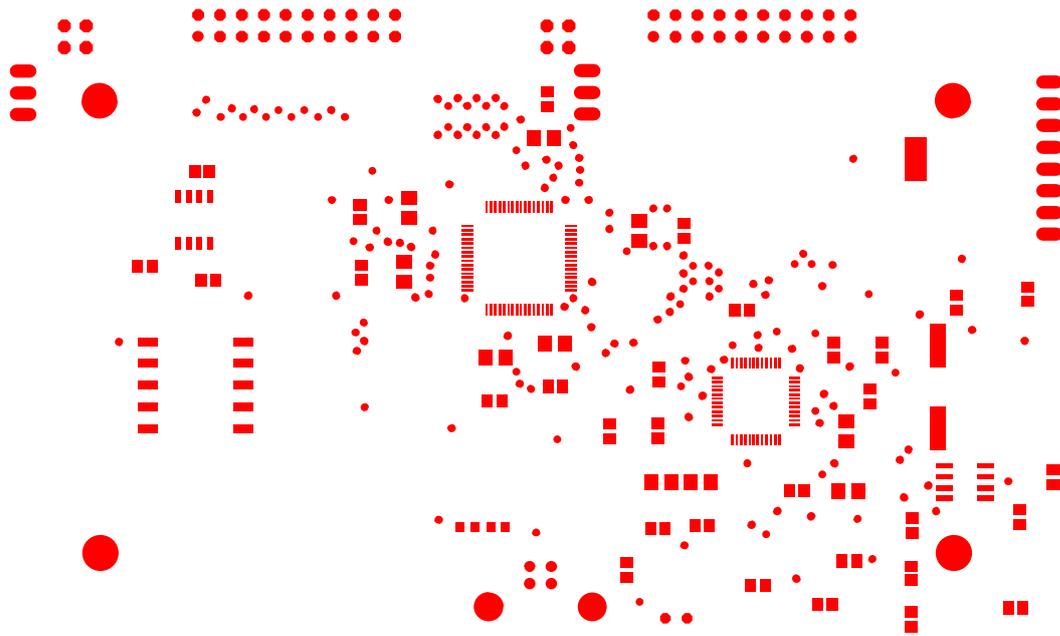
The exposed parts of the top layer of the PCB, visualized using the Gerber files.
